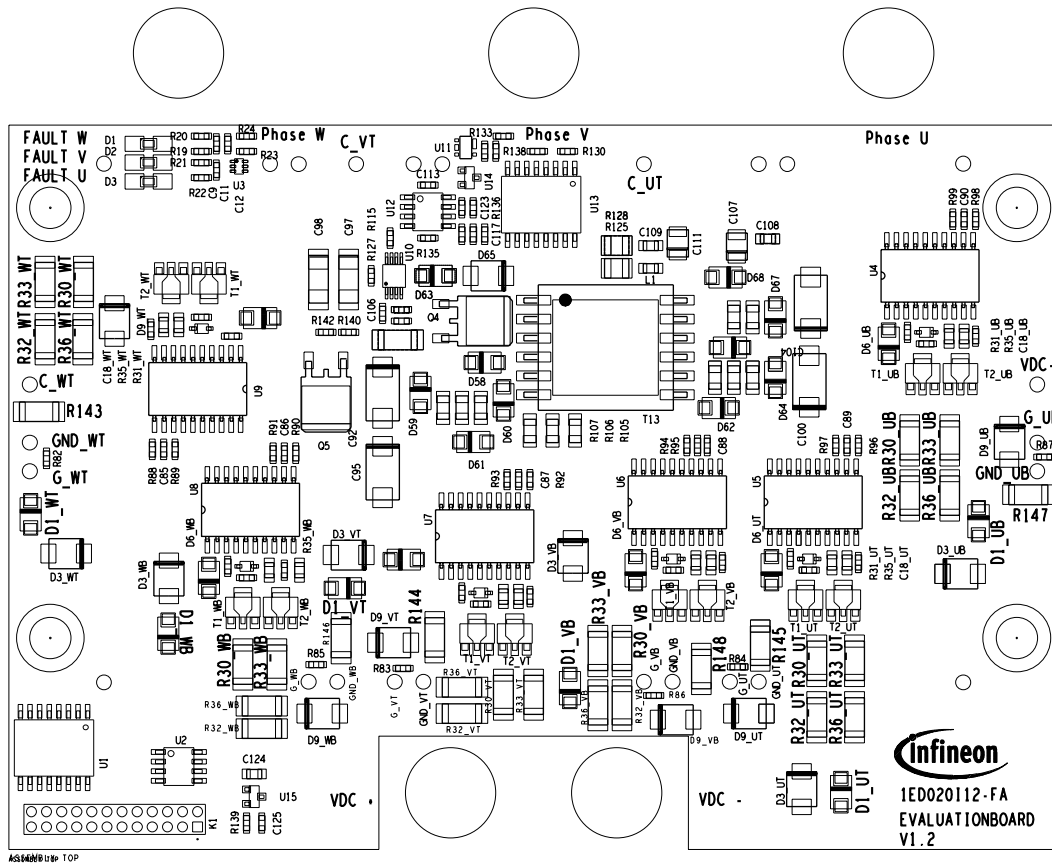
Assembly drawing of the HybridPack1™ driver board (top)
